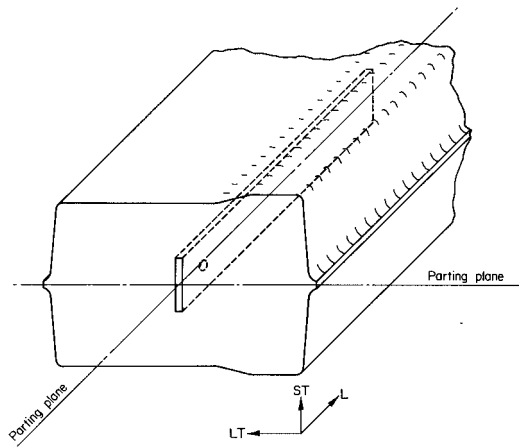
(c). Bearing specimen orientation for thick cross-section die forging.
